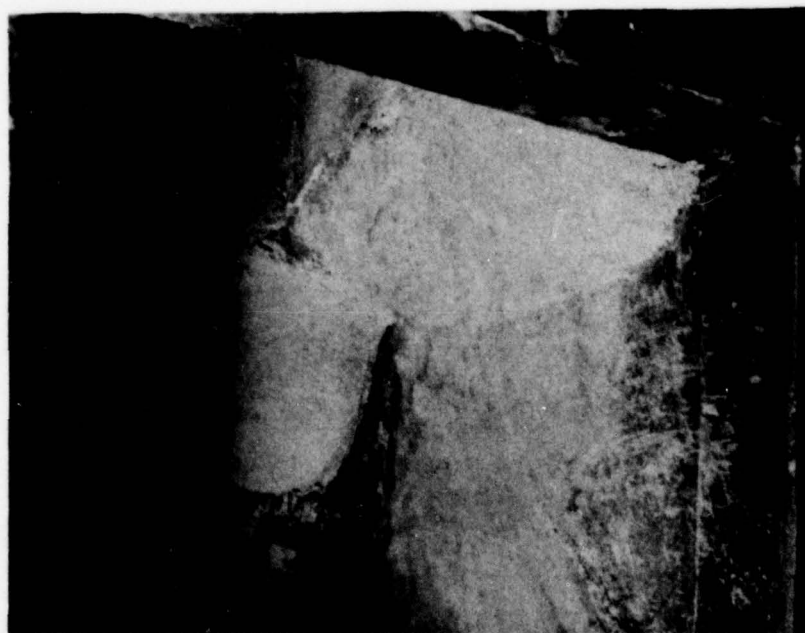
Dressing of Refractory Edge at Afterburner Section Outlet
